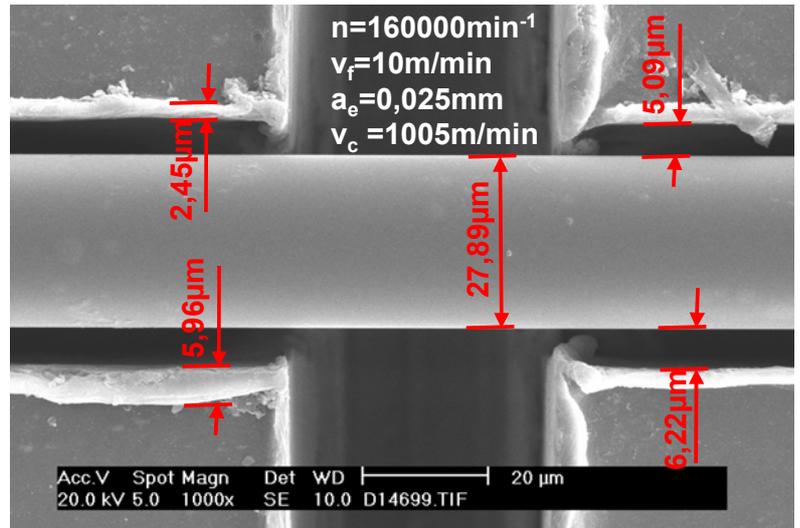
With diamond micro side milling cutter produced groove with inserted optical fiber
